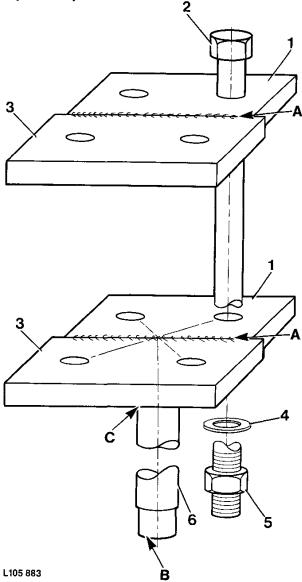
Holding Device (Self-Manufacture), Removal of Final Drive Assemblies
